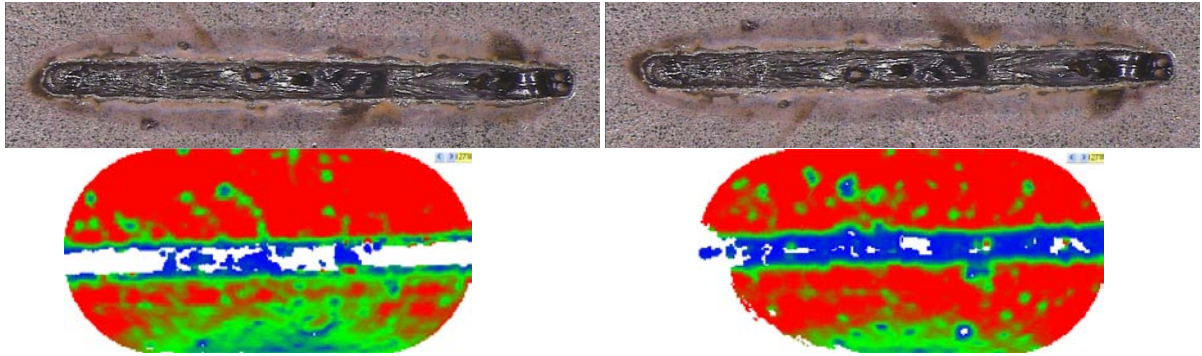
Weld top bead (0mm gap, sample E) and Amstech result from top bead (L) and bottom bead (R)
